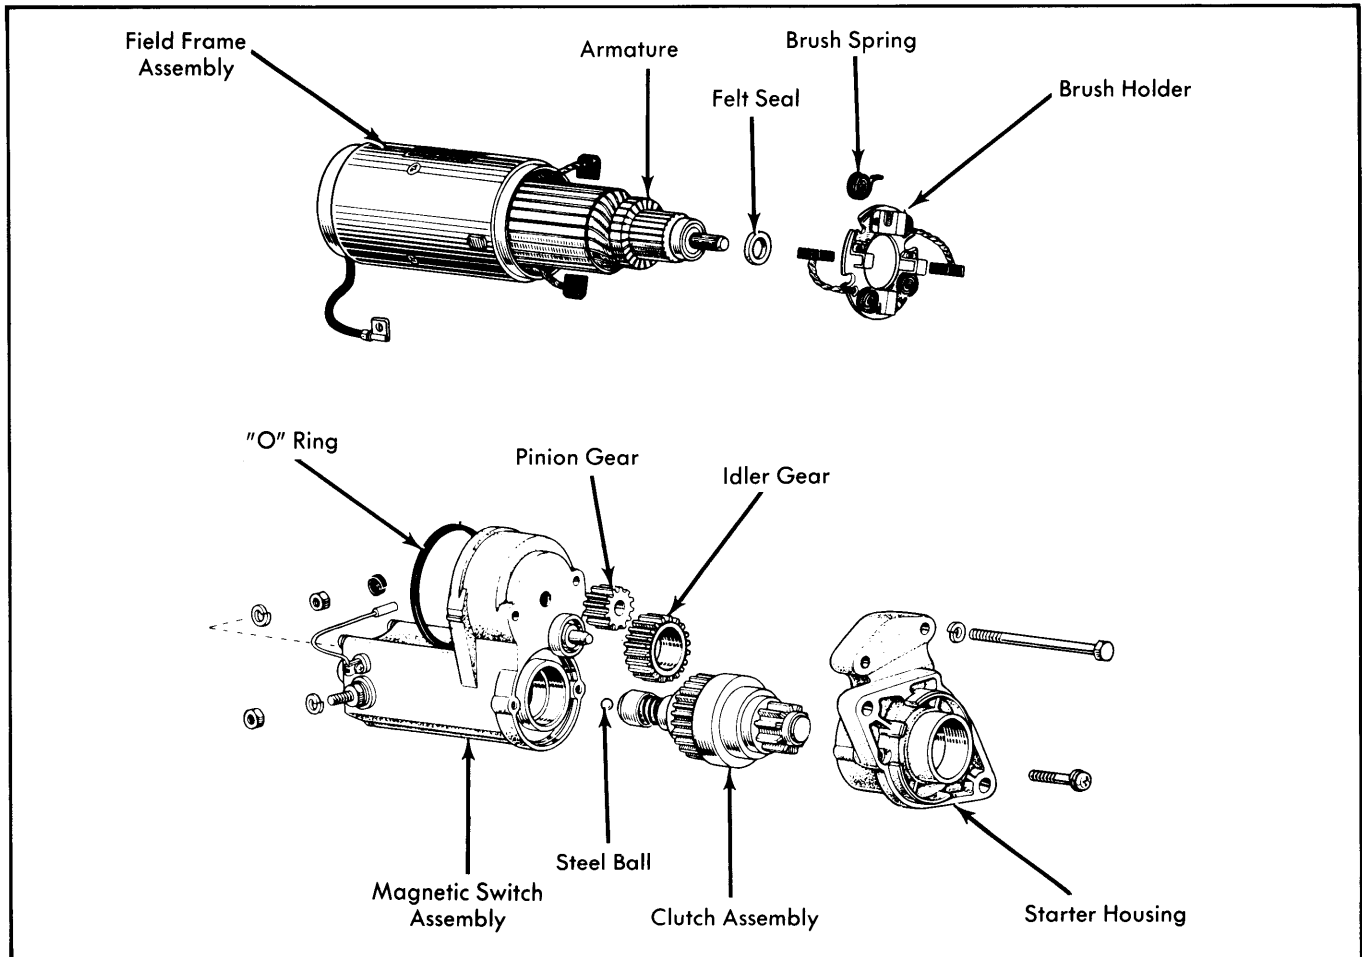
Exploded View of Nippondenso Reduction Gear Starter (Toyota Model for 20R Engine Shown, Others Similar)
